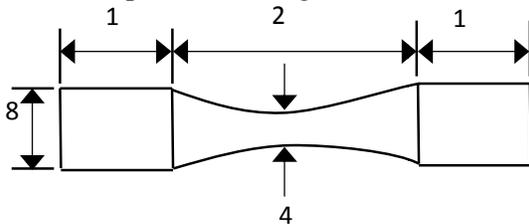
Fatigue Test Specimen (All dimensions in mm)
